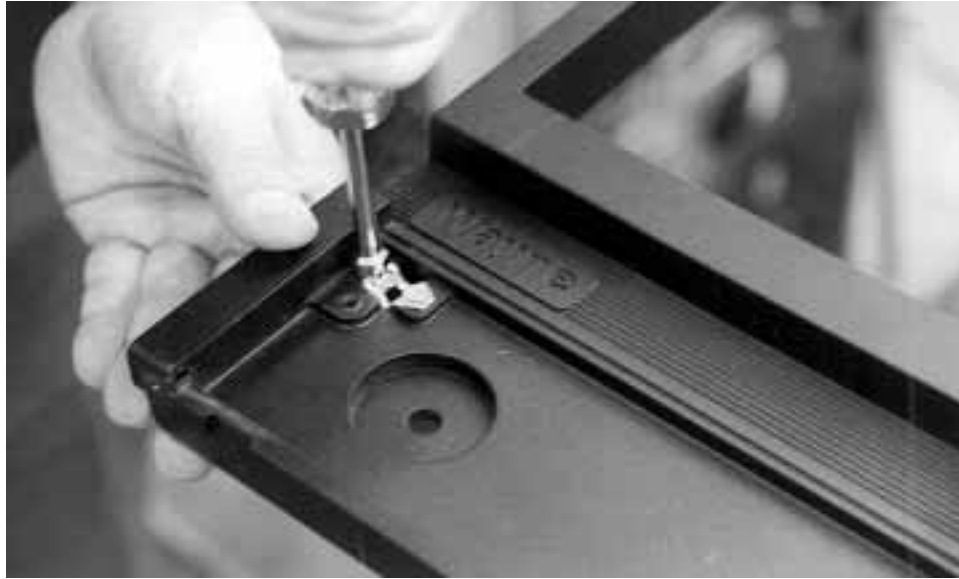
REMOVING THE EXISTING PUSH-TO-START SWITCH
